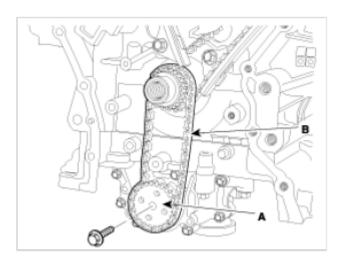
Identifying Oil Pump Chain And Oil Pump Sprocket With Mounting Bolts
